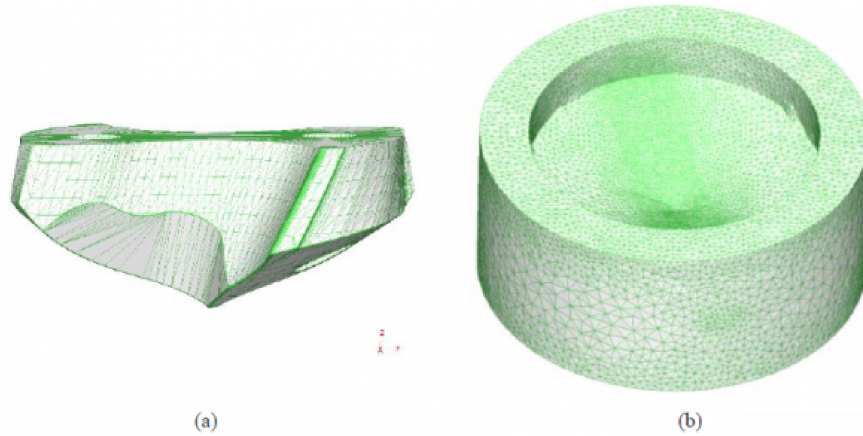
The 3D CAD geometry of the tool (a) and the workpiece (b).
